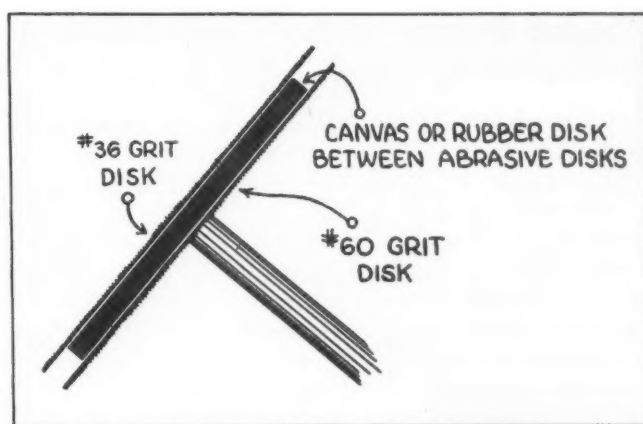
For Parts Having Fairly Large Holes to be Finished, Two Slotted Abrasive Disks, Supported by Canvas or Rubber Backing, Will Remove Tool Marks and Polish the Interior of the Hole
